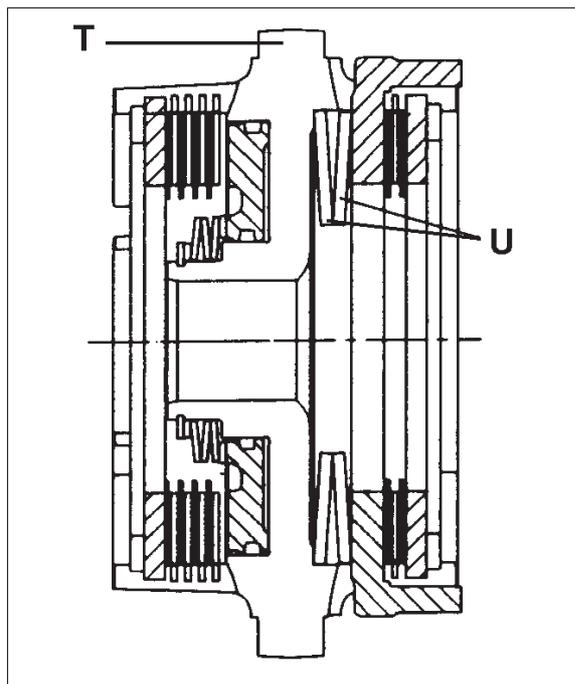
Preassembly of MEDIUM-LOW clutches.
